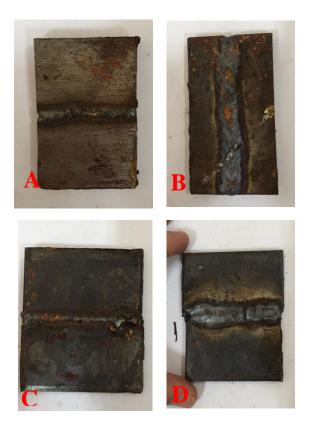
Electric Arc Welded samples; A) low carbon steel alloy, B) high carbon steel, MIG Welded samples; C) high carbon steel alloy and D) low carbon steel alloy.
